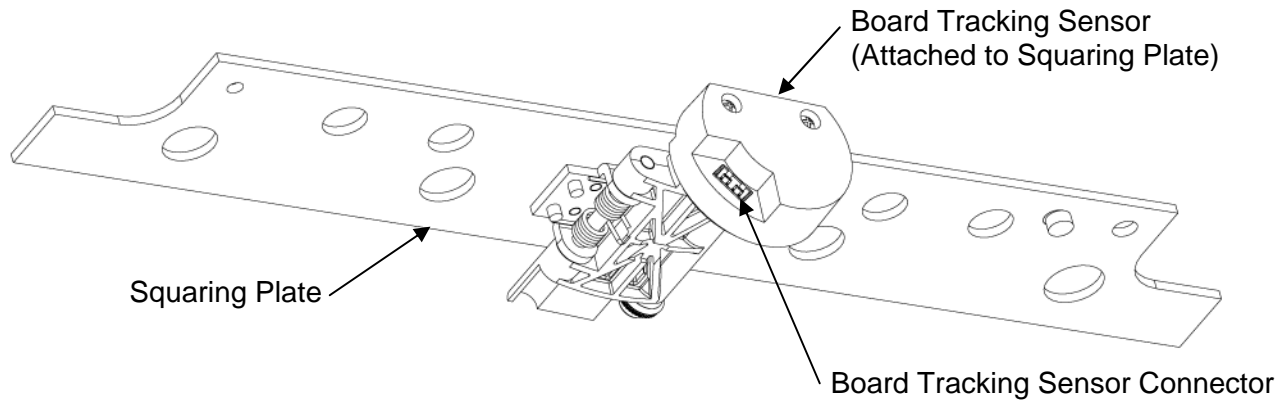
SQUARING PLATE ASSEMBLY (UNDERNEATH VIEW)
